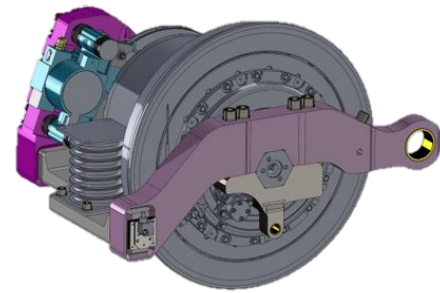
A Lucchini RS resilient wheel modelled on a TSA TMA 40-28-8 Motor integrated into a TAS Omega frame mounting bracket. Also shown, the primary suspension, brake caliper and Omega frame hinge rotation point.
